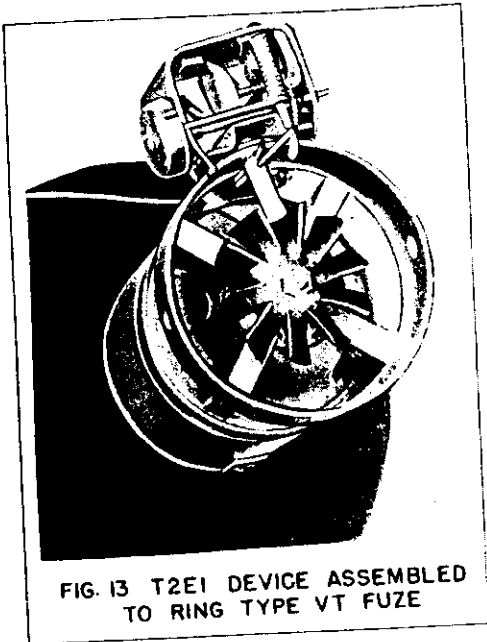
T2E1 DEVICE ASSEMBLED TO RING TYPE VT FUZE
